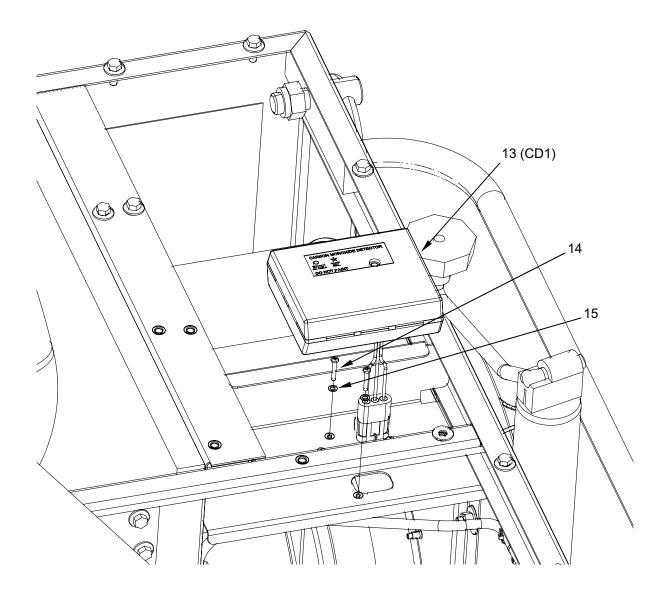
CO Detector, Cabinet Mounted (Sheet 4 of 6).
